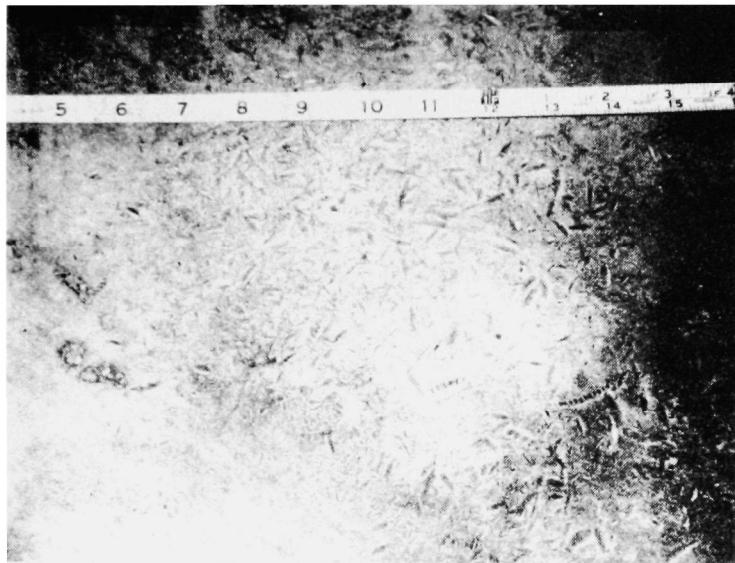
Section of the discharge valve plate at Shelley A. The surface is heavily dented.
